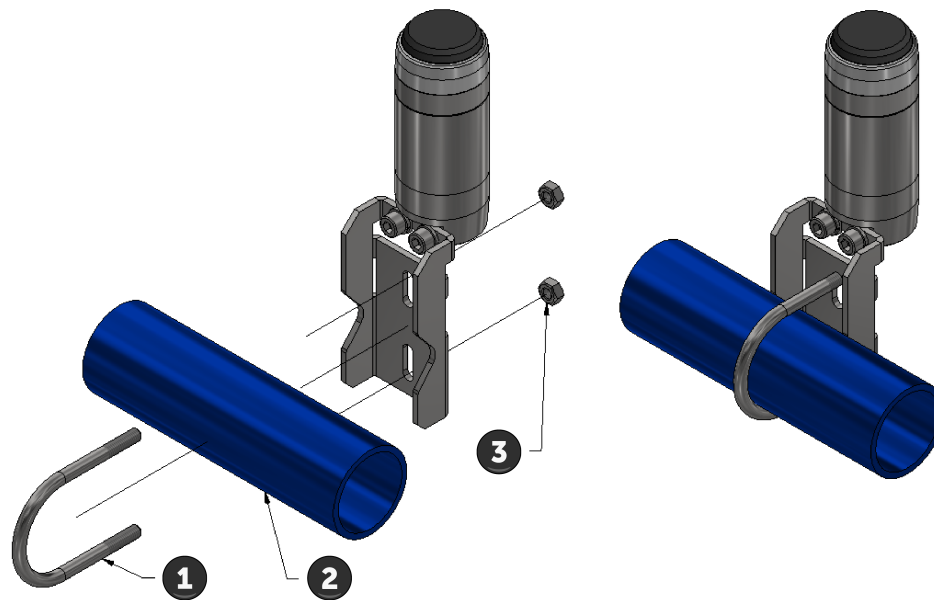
6: Attaching Mounting Bracket to a Horizontal Pipe
